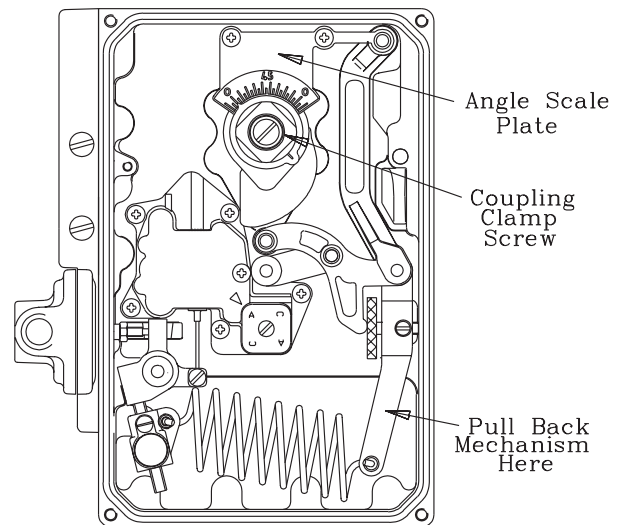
View of inside of Positioner Box Showing Parts for Removal During Installation.
